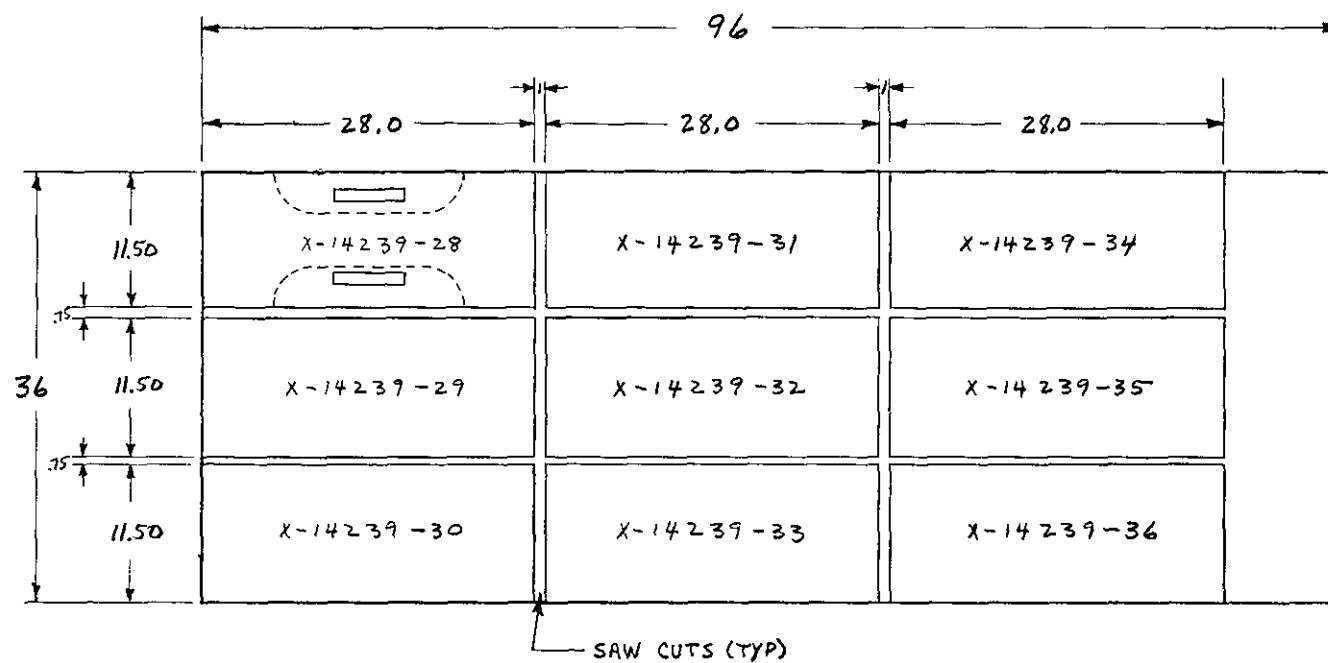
Specimen Blank Lay-Out for 3/8-Inch Thick 300 M Steel, HT 3932021
